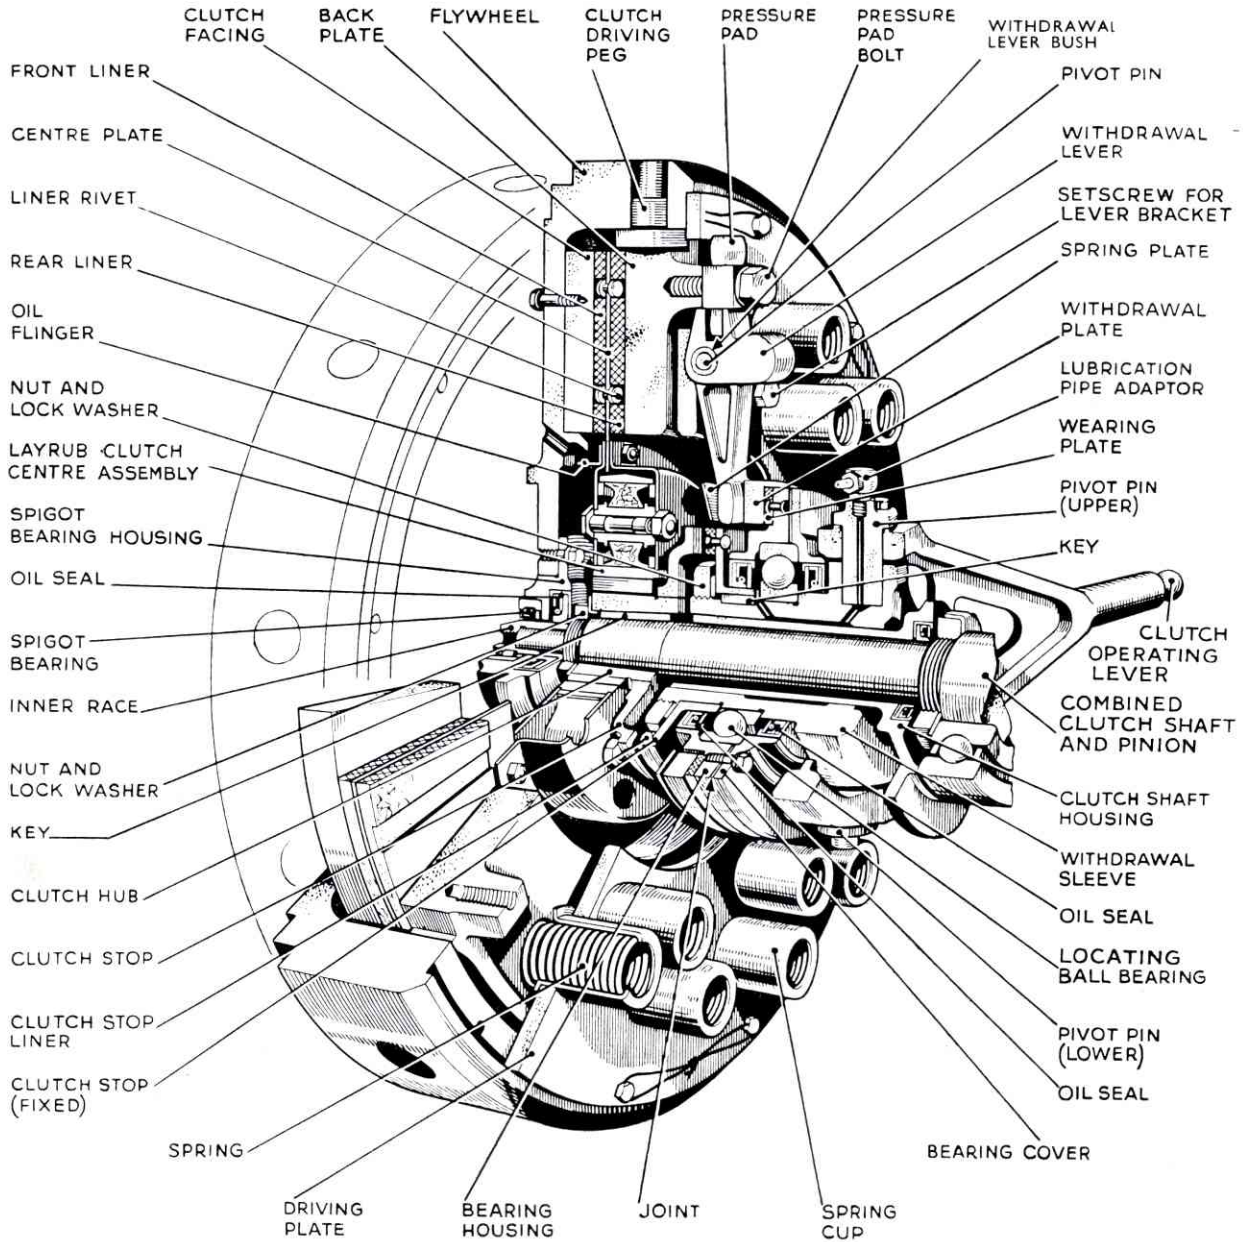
THE CLUTCH ON THE HEAVY GOODS VEHICLE
